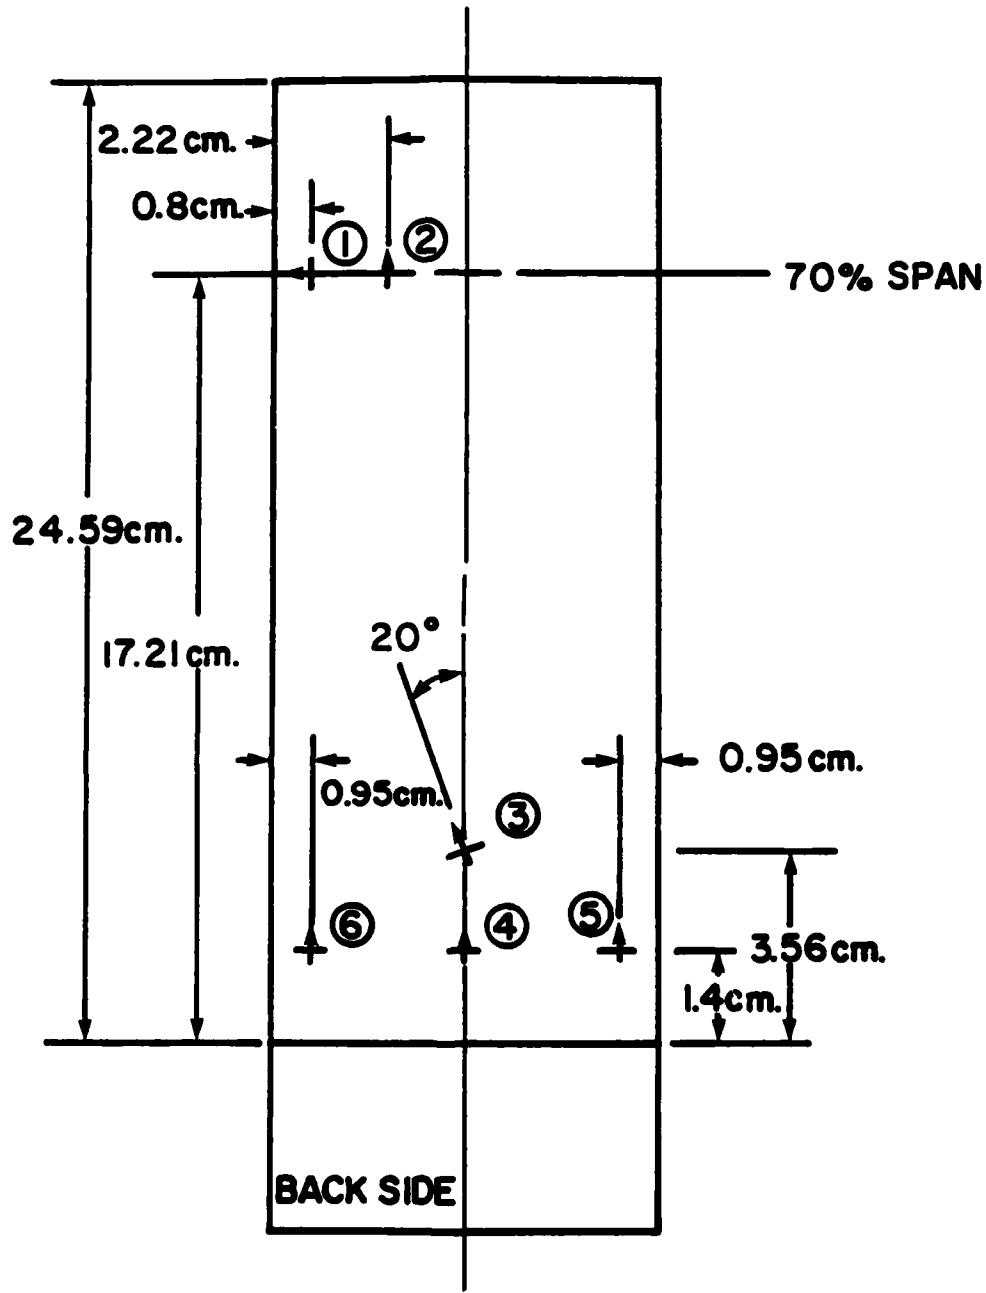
A. Strain Gage Locations for Group 11, 12, and 13 Structural Element Test Specimens.
